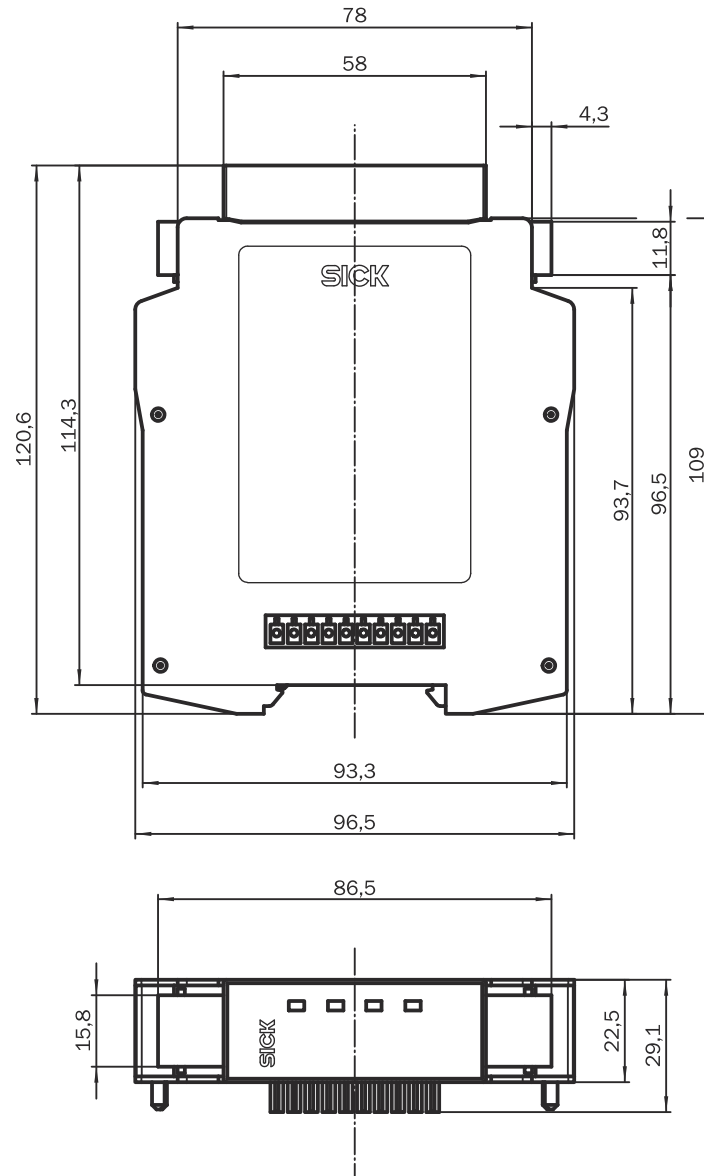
Dimensional drawing for FX0-GENT, FX0-GMOD, FX0-GPNT and FX0-GETC (mm)
